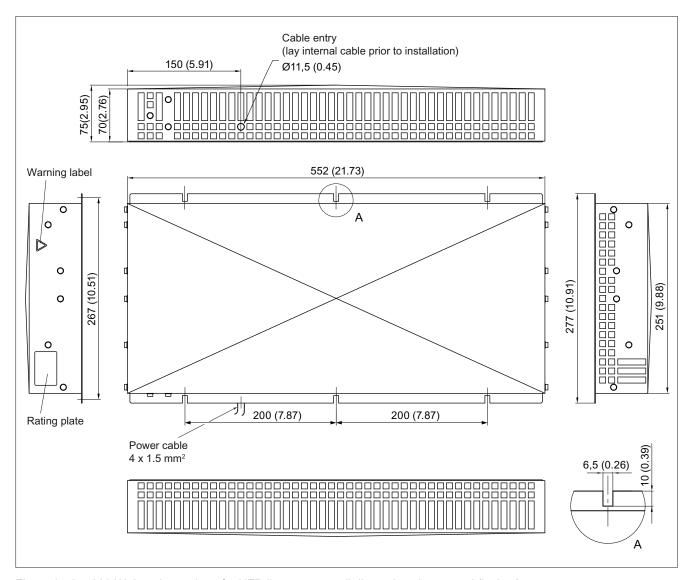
800 W damping resistor for HFD line reactors, all dimensions in mm and (inches)
